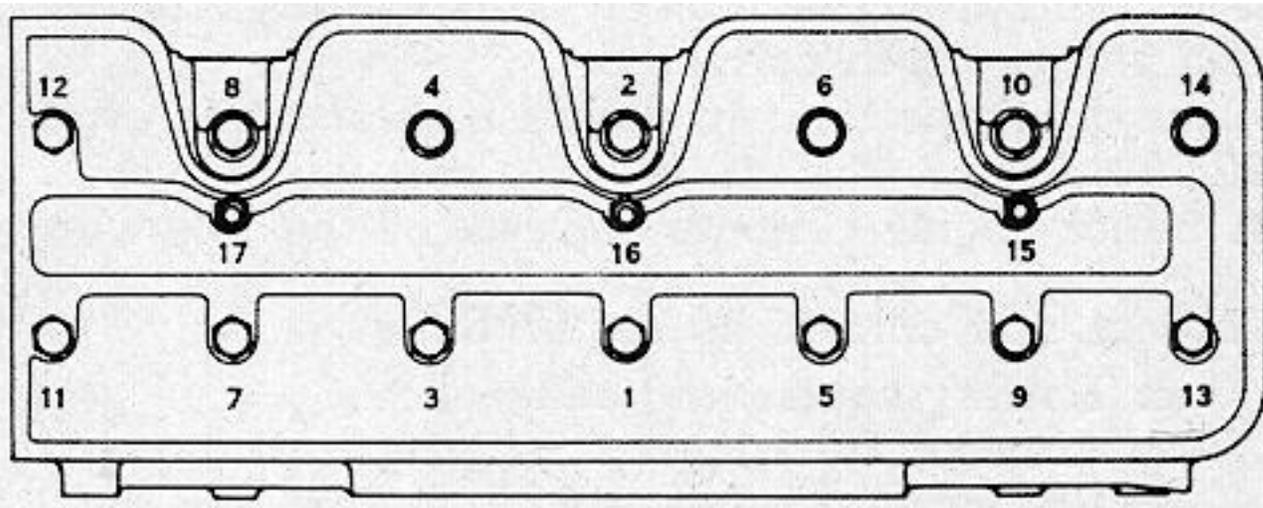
CYLINDER HEAD BOLT TIGHTENING SEQUENCE
